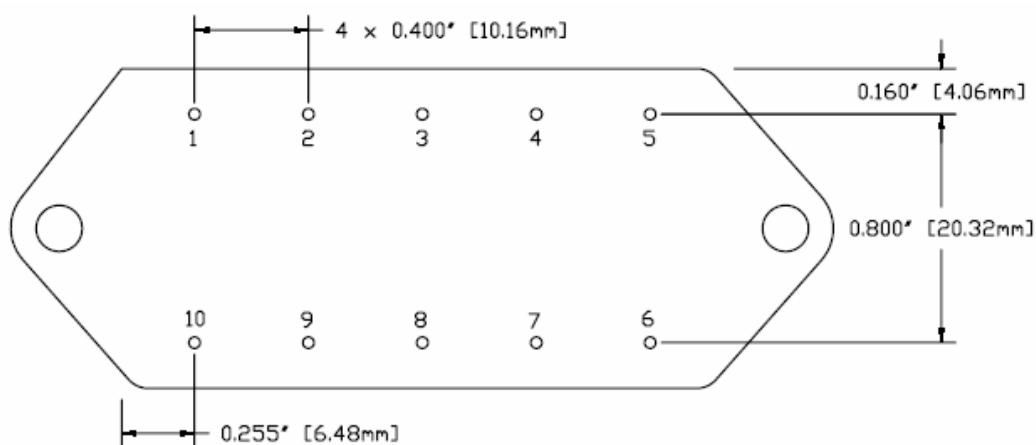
Non-Flanged, Seam Seal Package and Pinout
